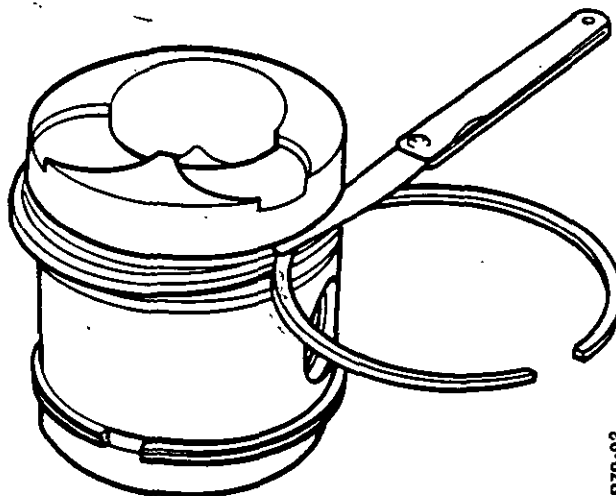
CHECKING PISTON RING GROOVE CLEARANCE
